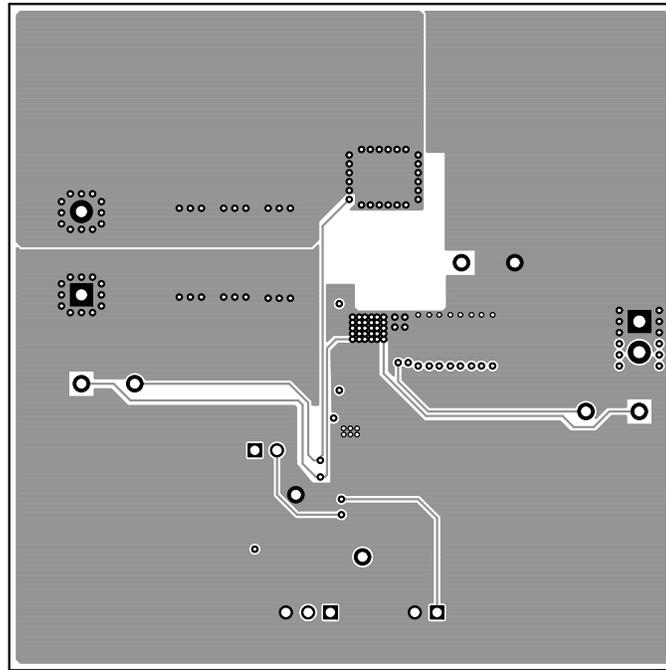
CSD86350Q5DEVM-604 Bottom Copper (Bottom View)
